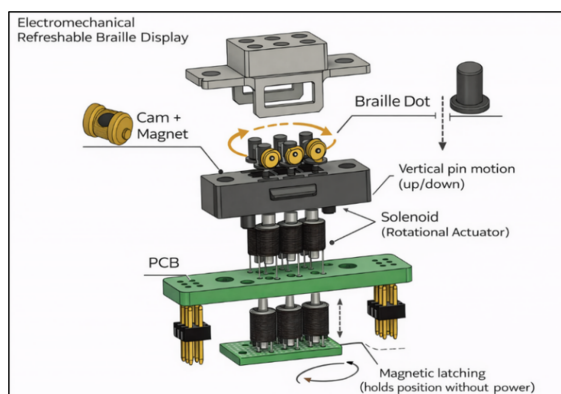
Exploded view of the cam-latching refreshable Braille cell mechanism.
